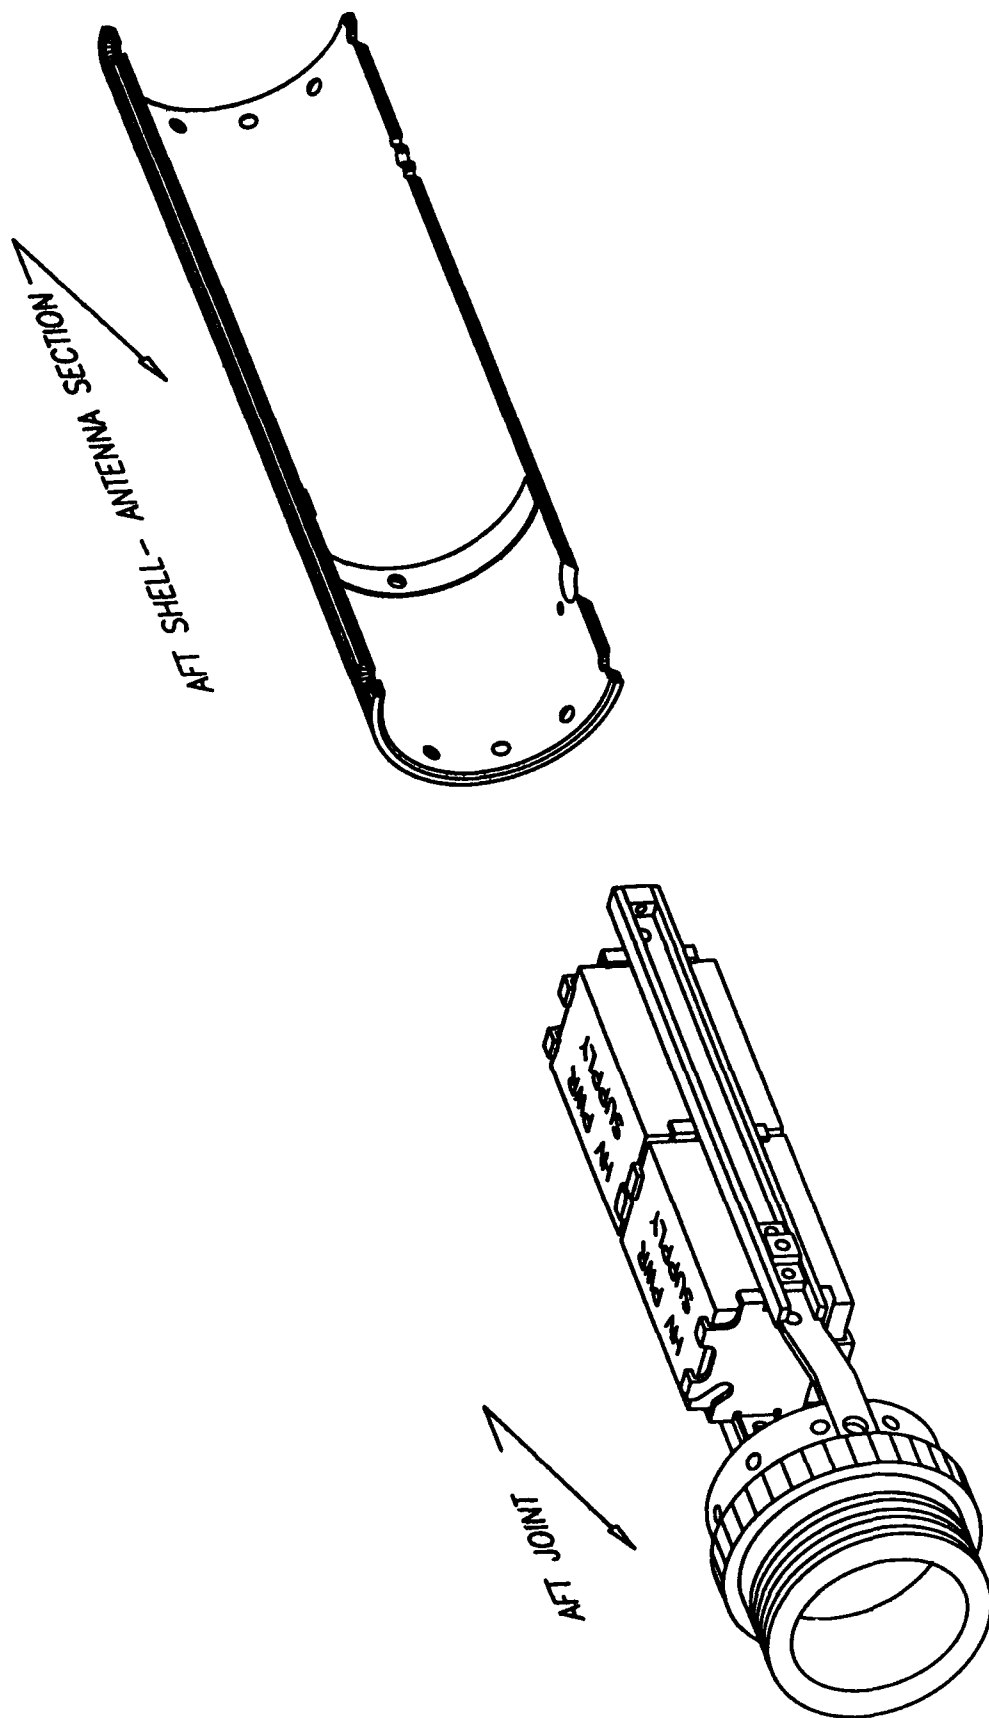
Detail of the High-voltage Section, Showing the Aft Joint, Mounting Brackets for the High-voltage Power Supplies and S-band Transmitter (not Shown), and the Aft Shell That Carries the Telemetry Antenna
